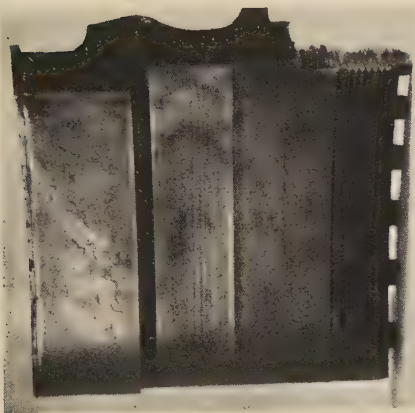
Typical Intercrystalline Burning Cracks revealed by magnetic crack detection on section of machined, upset, ring forging.  $\times \frac{1}{2}$ .
